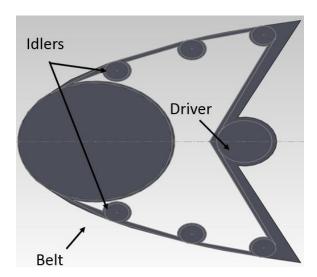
The surface motion produced by conveyor belt mechanism "initial design"
